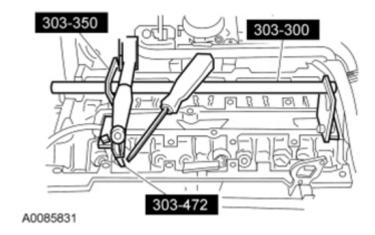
Remove/Install Valve Spring And Valve Spring Retainer Using Valve Spring Compressors Courtesy of FORD MOTOR CO.
